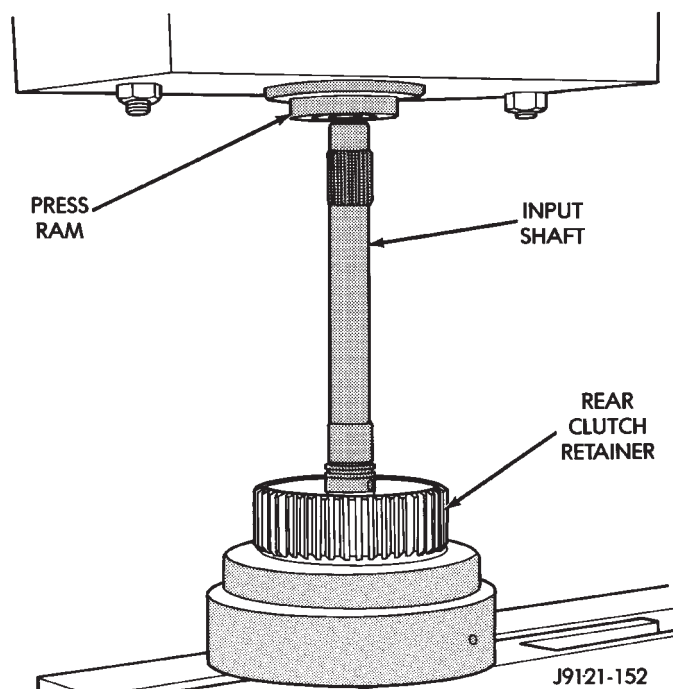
Pressing Input Shaft Into Rear Clutch Retainer
